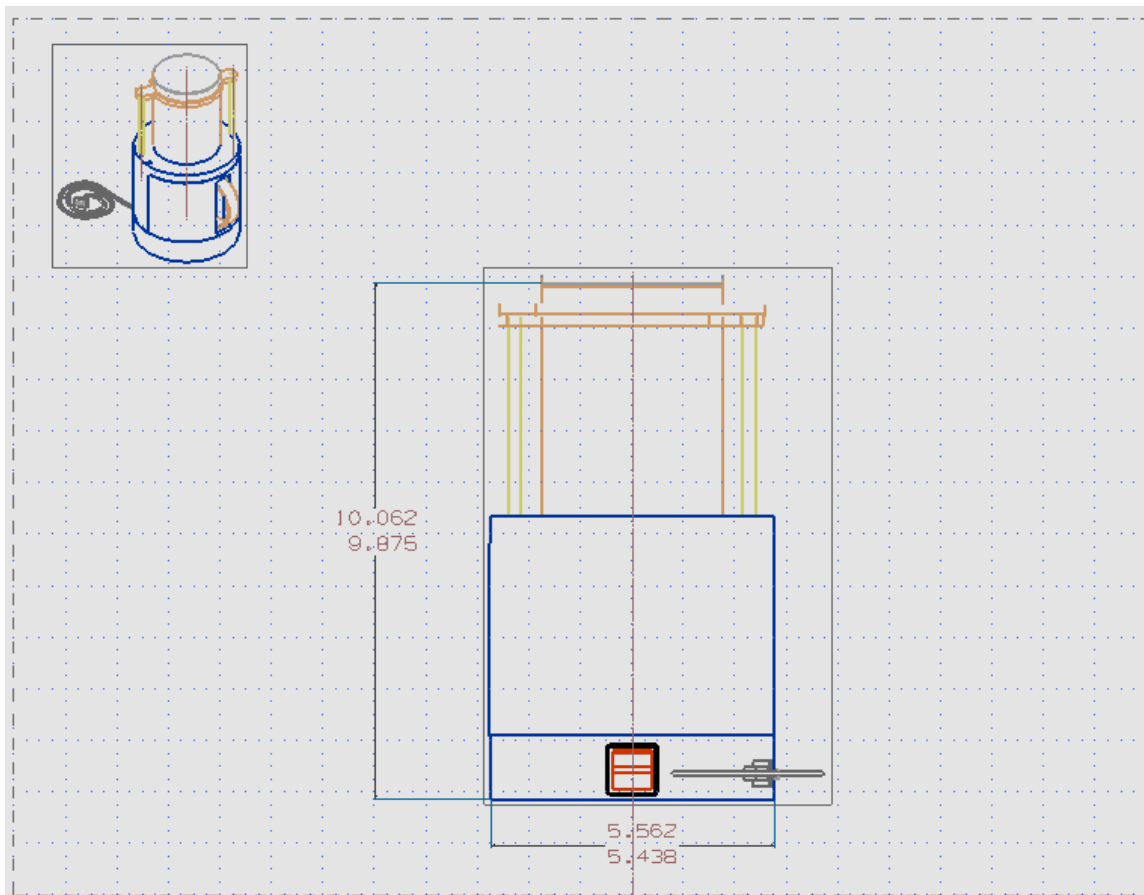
Engineering Drawing of Coffee Maker Assembly in Expanded Position
